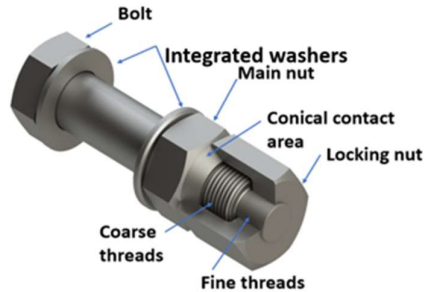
Test bolt of type Vibralock® for tensioning of the shank
